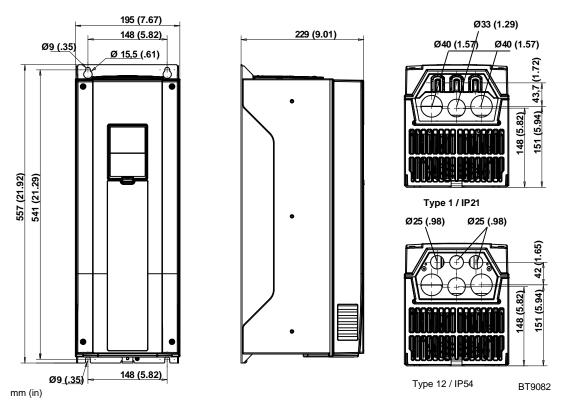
Siemens Drive Dimensions, FS6, Wall-Mount.
